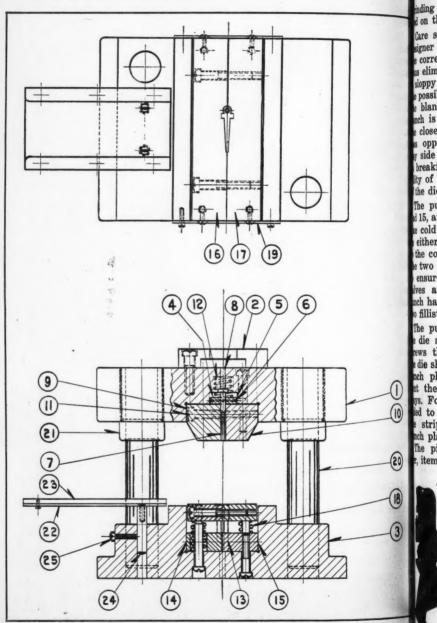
Assembly drawing illustrating design of compound type of piercing and blanking used to produce the blank shown in Fig. 1.
